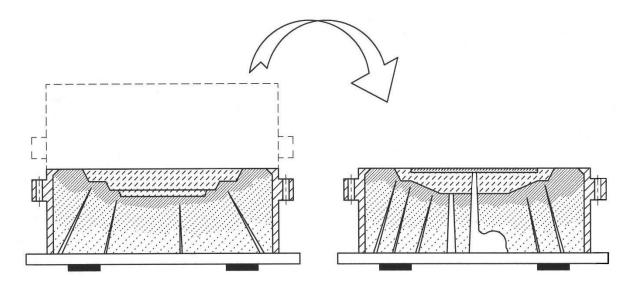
mould dismantling in order to remove patterns of component and gating system
